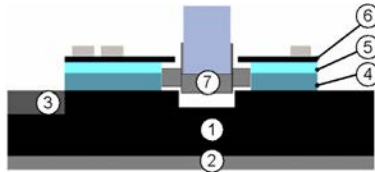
Figure A-II: Names of the aluminum parts composing the AFM scanner: 1) Main part; 2) Bottom part; 3) Lateral part; 4) Lower plate; 5) Upper plate; 6) Cover; 7) Suspended platform.
